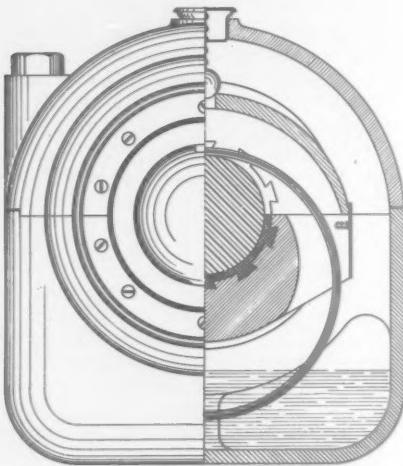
End view of this sleeve bearing shows that the oil ring is completely enclosed in the bushing (except for a short distance above the oil surface) to prevent the rings from spraying oil against housing walls.
